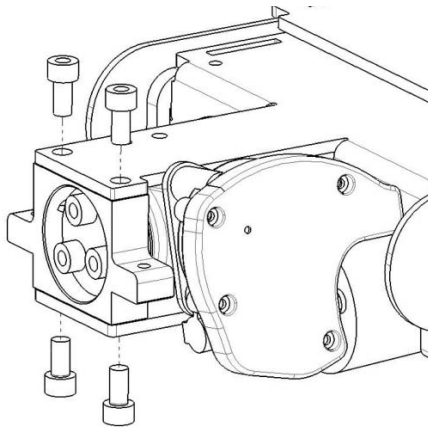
Remove the four screws holding the rear edge of the actuator.
